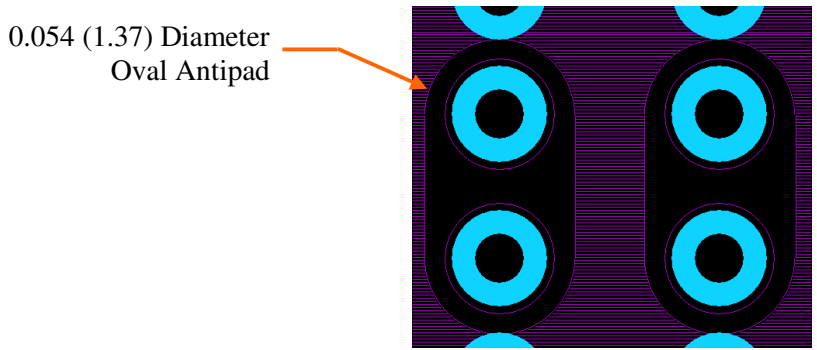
Antipad Clearance – Crossbow™ 2mm+ Daughtercard Connector
